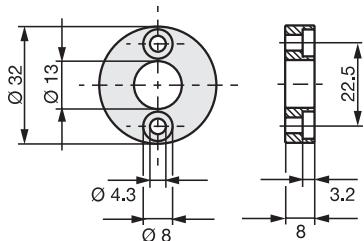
Installation dimensions of BTL-P-1013-4R magnet
